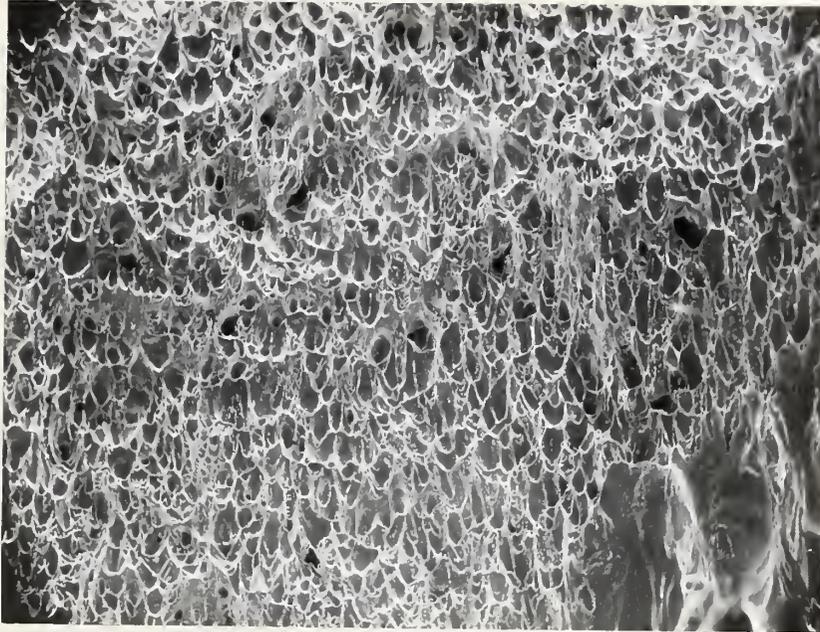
SEM photomicrograph of fracture surface of tensile specimen failed through weld metal at 70° F. Dimpled rupture is essentially the only fracture feature exhibited. X 140
